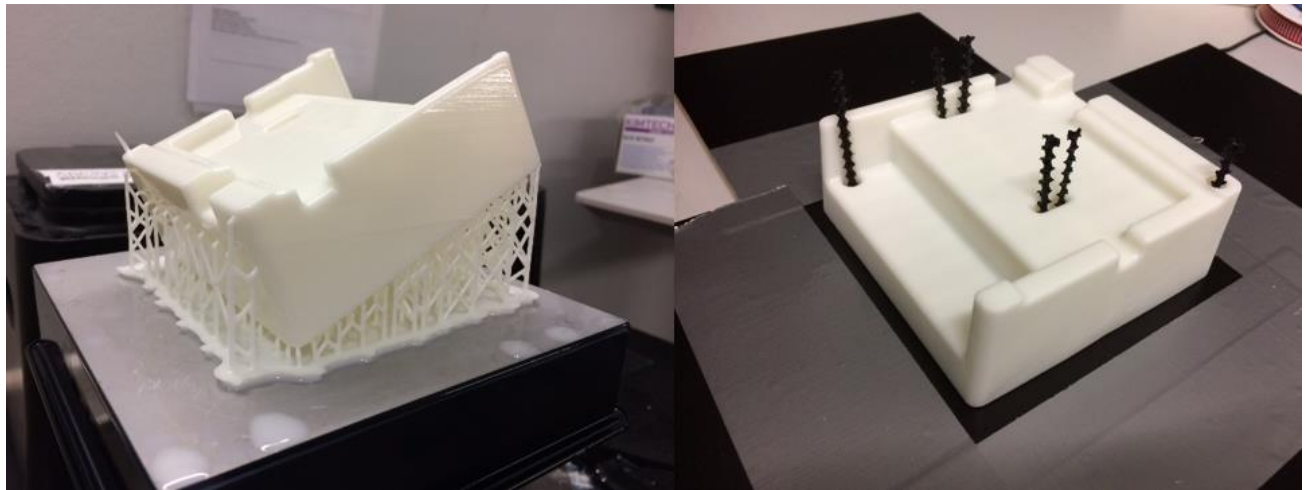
SLA Printed Pattern with Supports (left), Prior to Silicone Casting (right)
